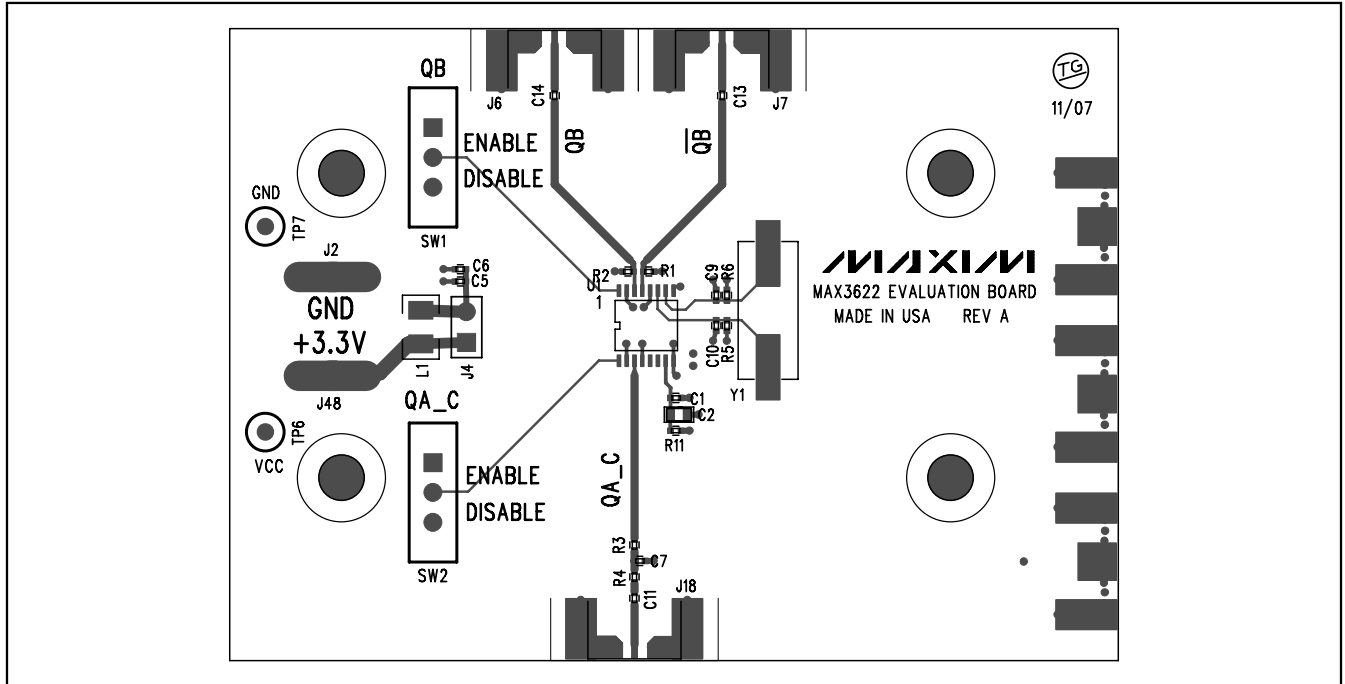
MAX3622 EV Kit Assembly Drawing—Top Side
